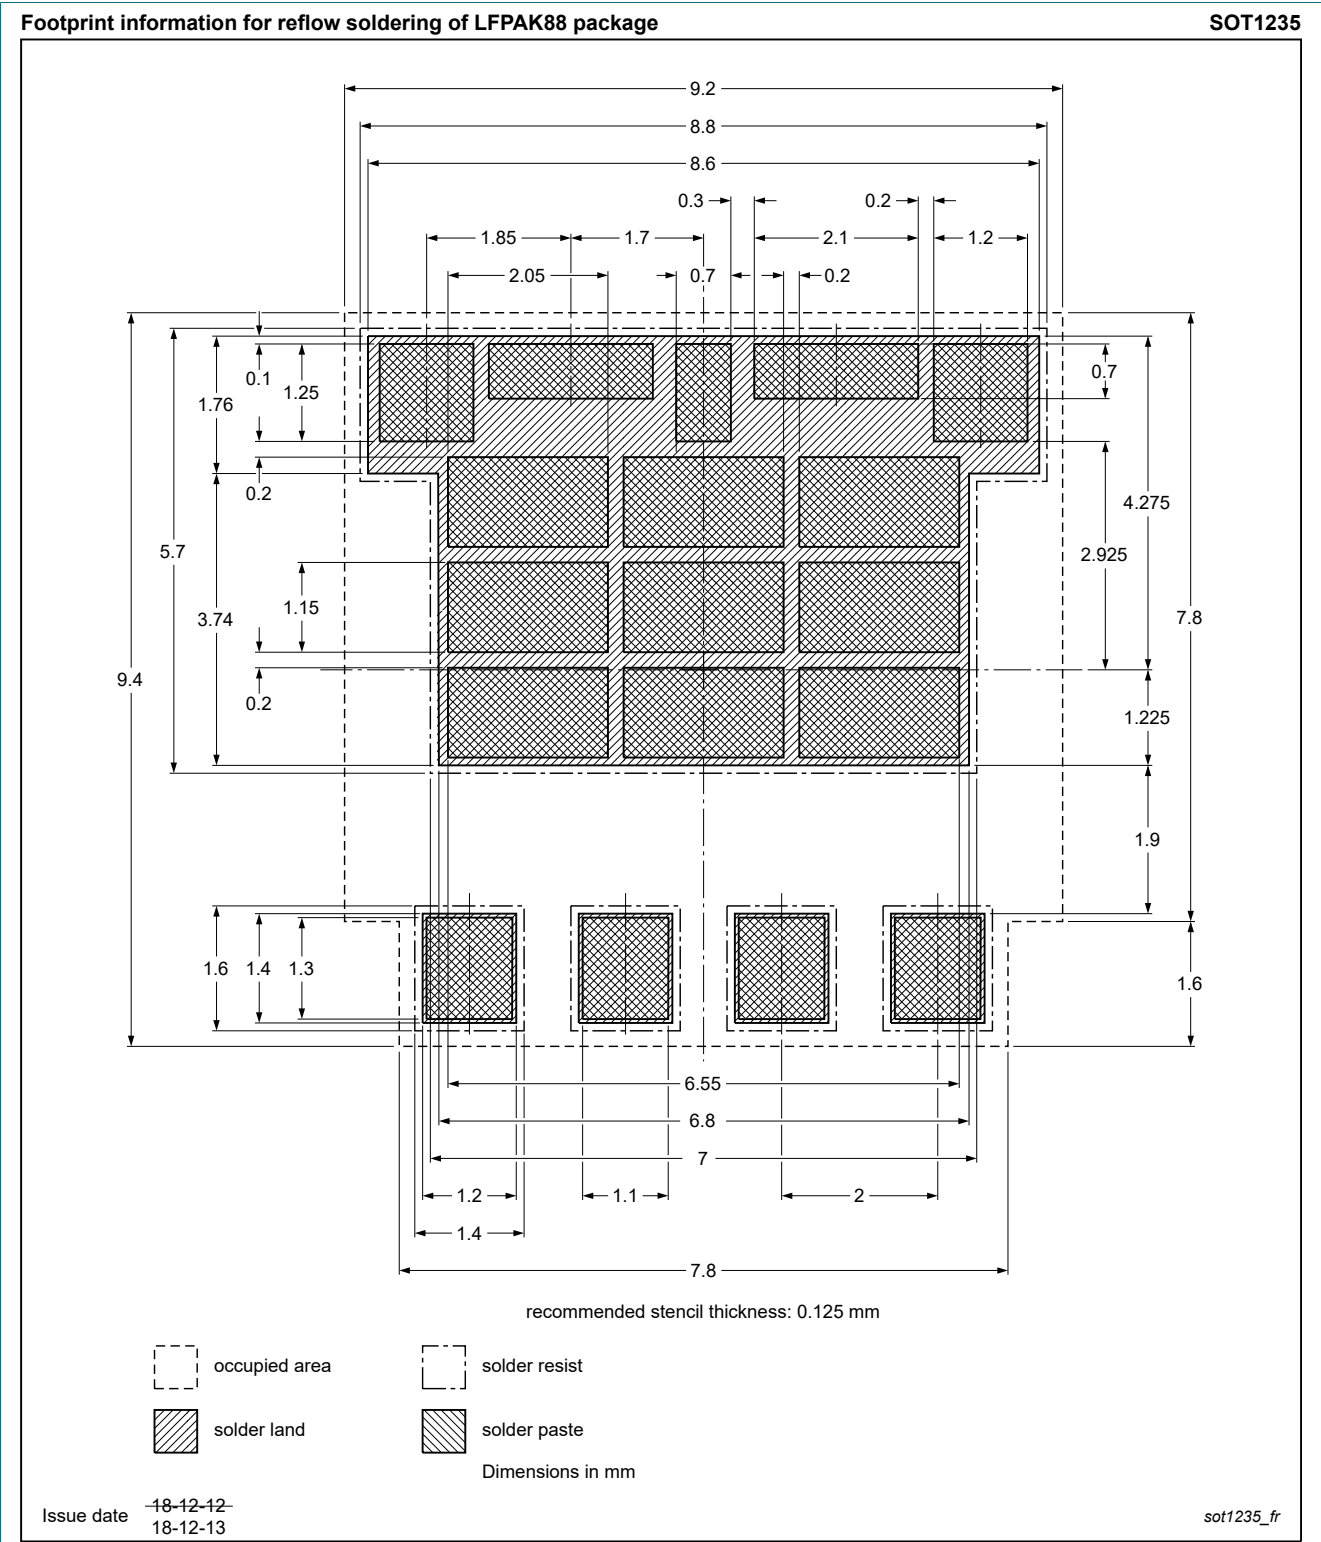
Reflow soldering footprint for LPAK88 (SOT1235)
